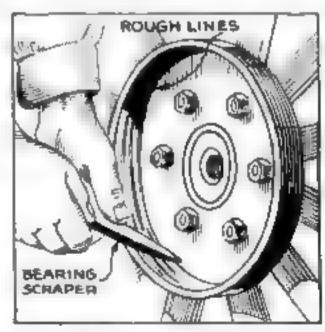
Tool's marks on braking surfact of drum cause pounding. Polishing cods it.
